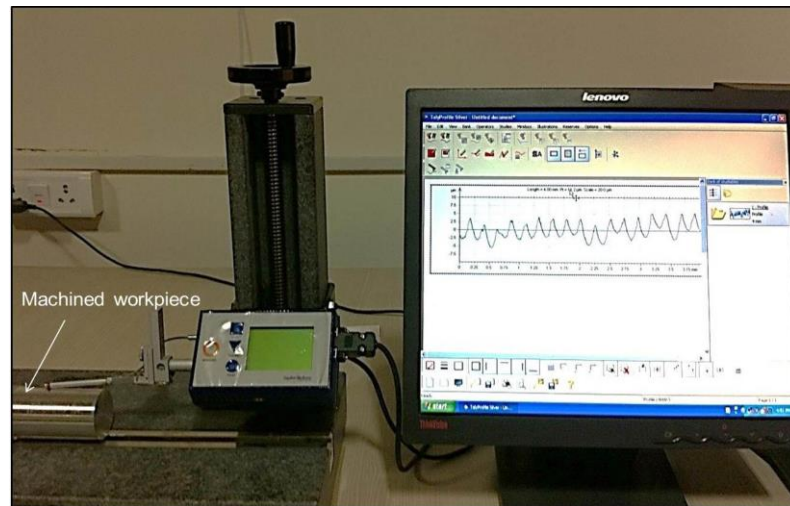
A sample measure of surface finish on machined work material using surface profilometer (Taylor Hobson Surtronic S25)
